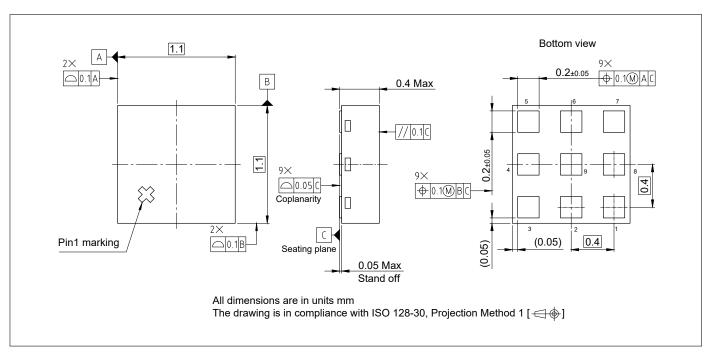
TSNP-9-6 Package Outline (top, side and bottom views)
